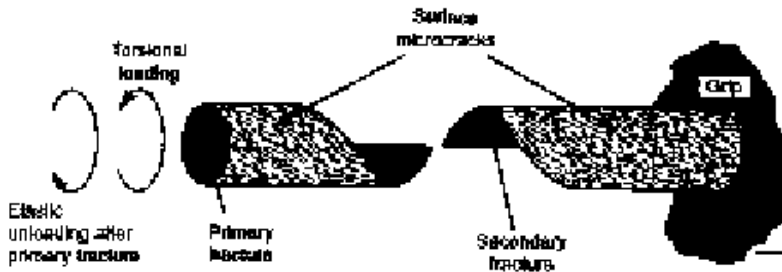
Schematic diagram of torsion-tested wire in which a primary transverse shear fracture and a spiral delamination fracture (labeled “secondary fracture”) have developed. Source: Ref 15.48
